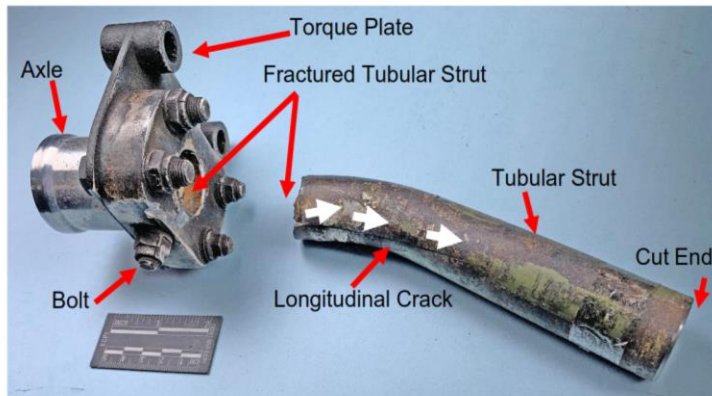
As-received lower portion of the RMLG assembly showing the axle, torque plate for the brake assembly, and mating fractures of the tubular strut (spring assembly). The longitudinal crack propagated in the general direction indicated by white arrows.
